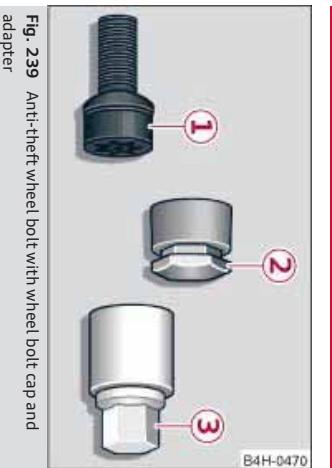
Anti-theft wheel bolt with wheel bolt cap and adapter
